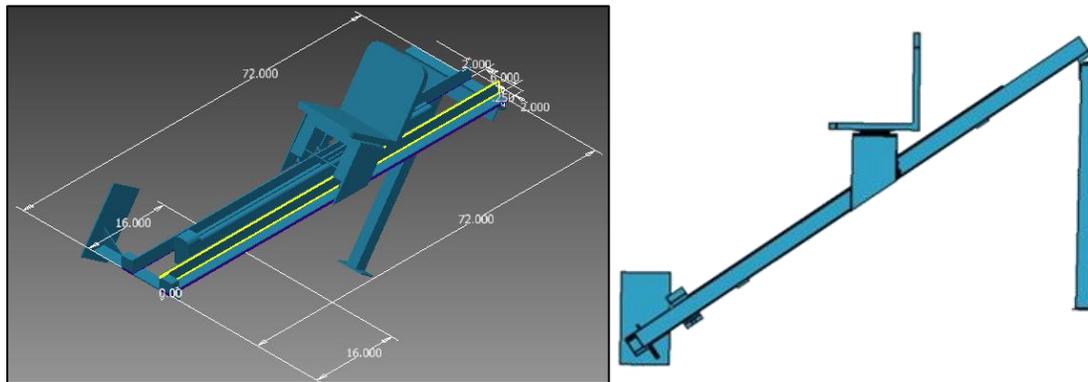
The inclined lift, side-view (top, left), front and rear mounting plate-top, view (side, right). Note: Dimensions are approximate.
